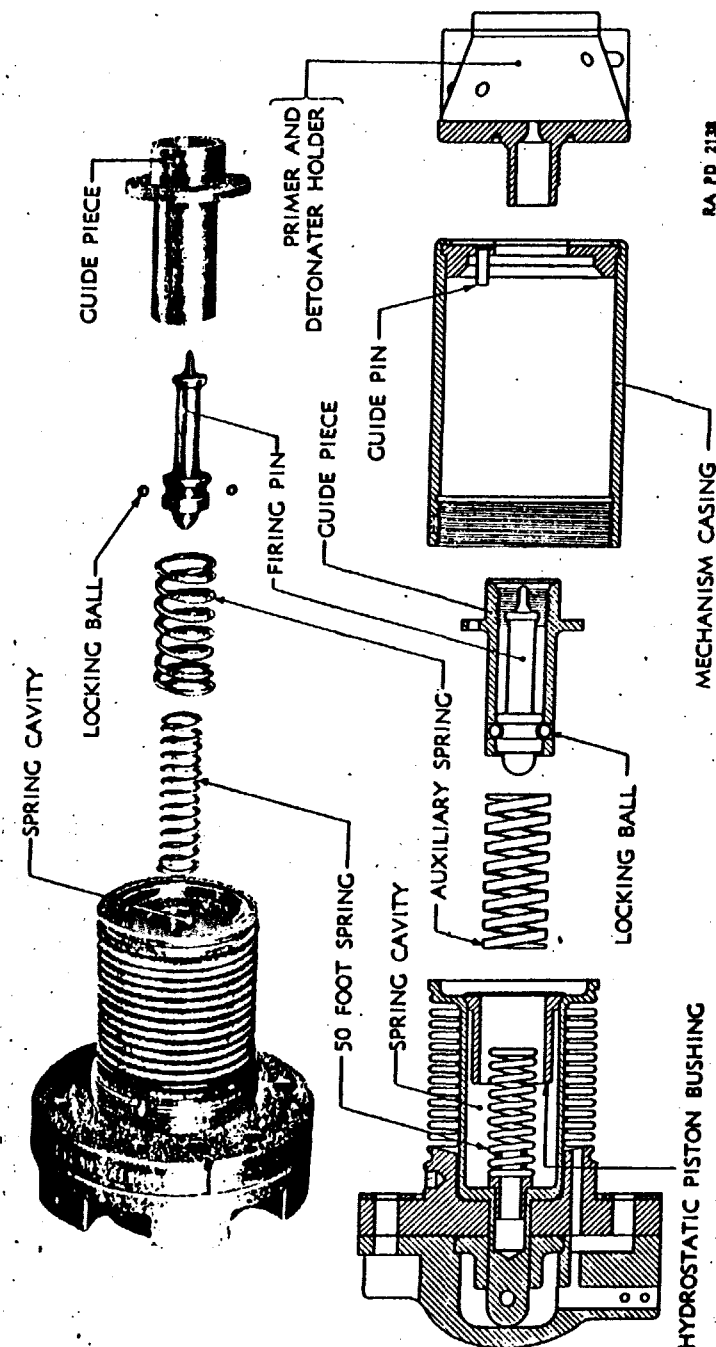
FUZE, AN-Mk. 224, Reassembly of Pistol, With Auxiliary Depth Spring
